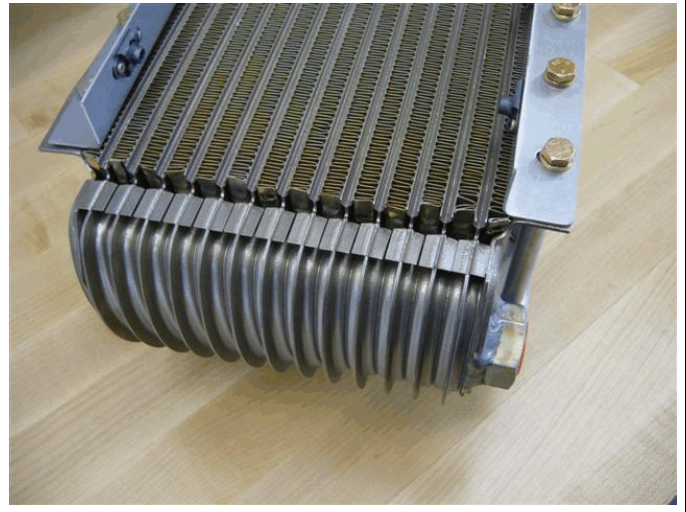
Remove duct and locate side of cooler as shown. Leave mounting brackets installed.
